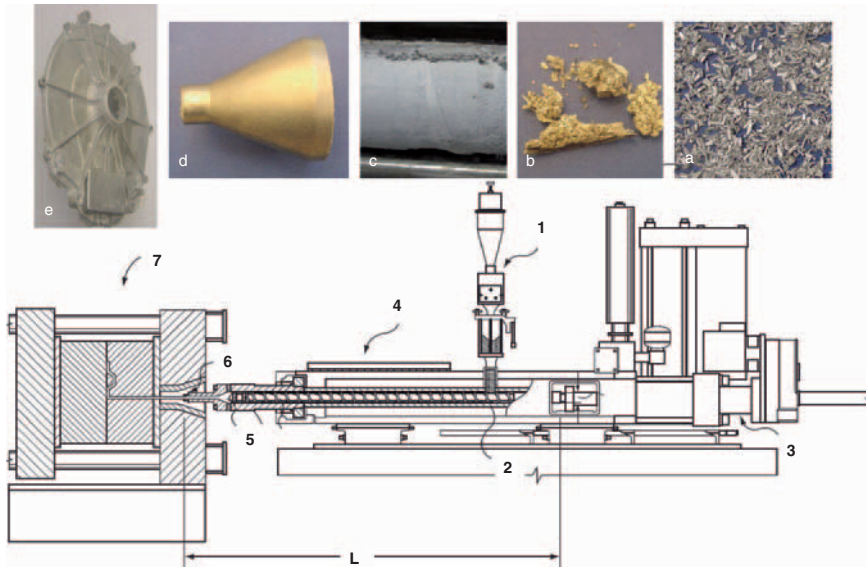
The flow path of chipped alloy from the hopper to the mold: a chips before feeding into the machine; b feedstock partially processed; c end section of the screw; d alloy filling the barrel head; e molded component
